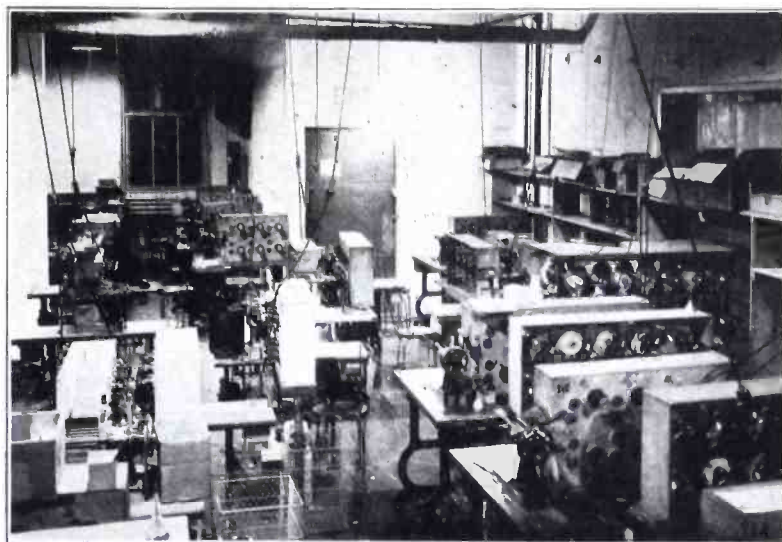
A view of the winding department, showing the winding machines which automatically "roll" layers of paper and tinfoil to the desired capacity
